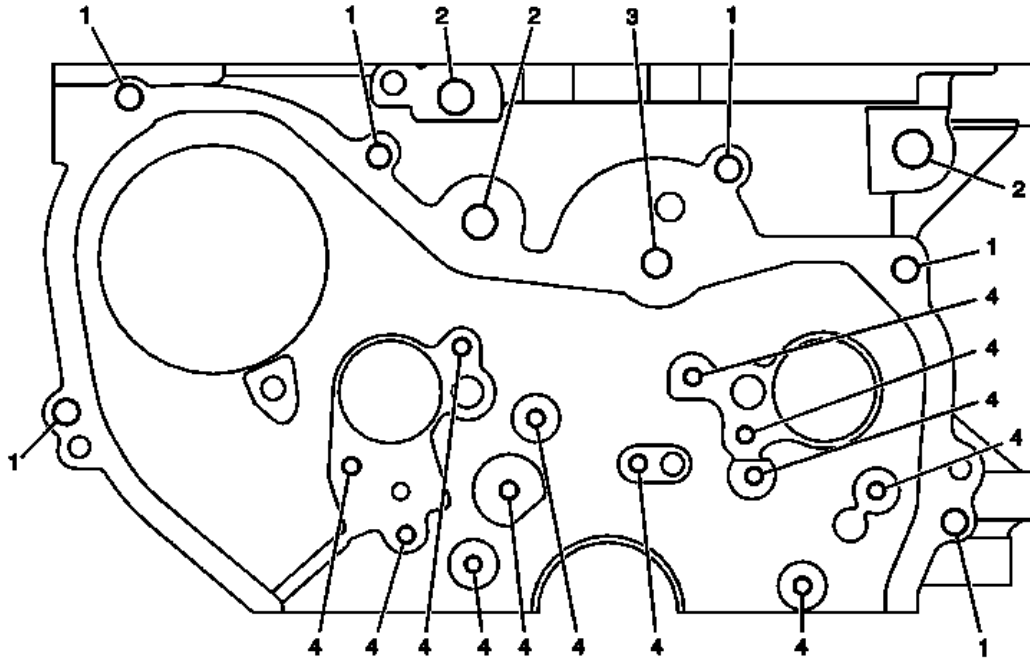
Identifying Bolt Size & Locations On Engine Block - Front View
